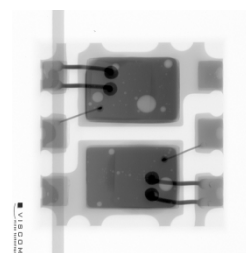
DFN2020-6 (SOT1118) Component D280 without wettable side pads
